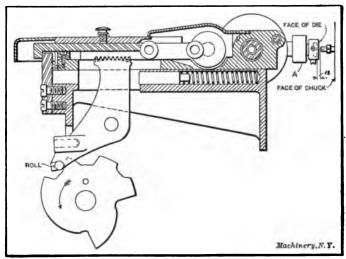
Position of Roll on Thread Lobe when setting Die or Tap
